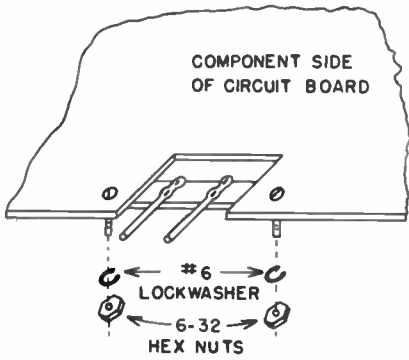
Details for mounting the ac interlock at the cutout on the board.
